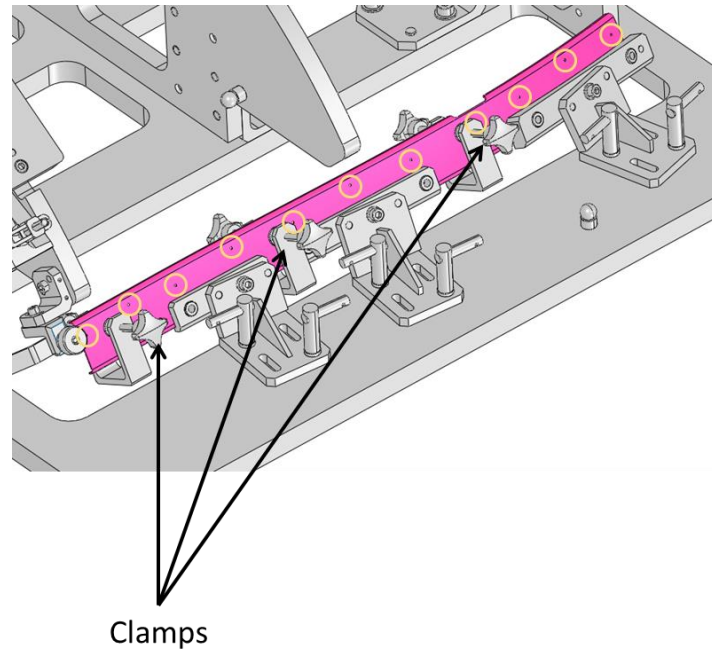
KPCs (gaps at riveting locations) and KCCs (clamp positions) in longitudinal stiffener and skin section assembly
